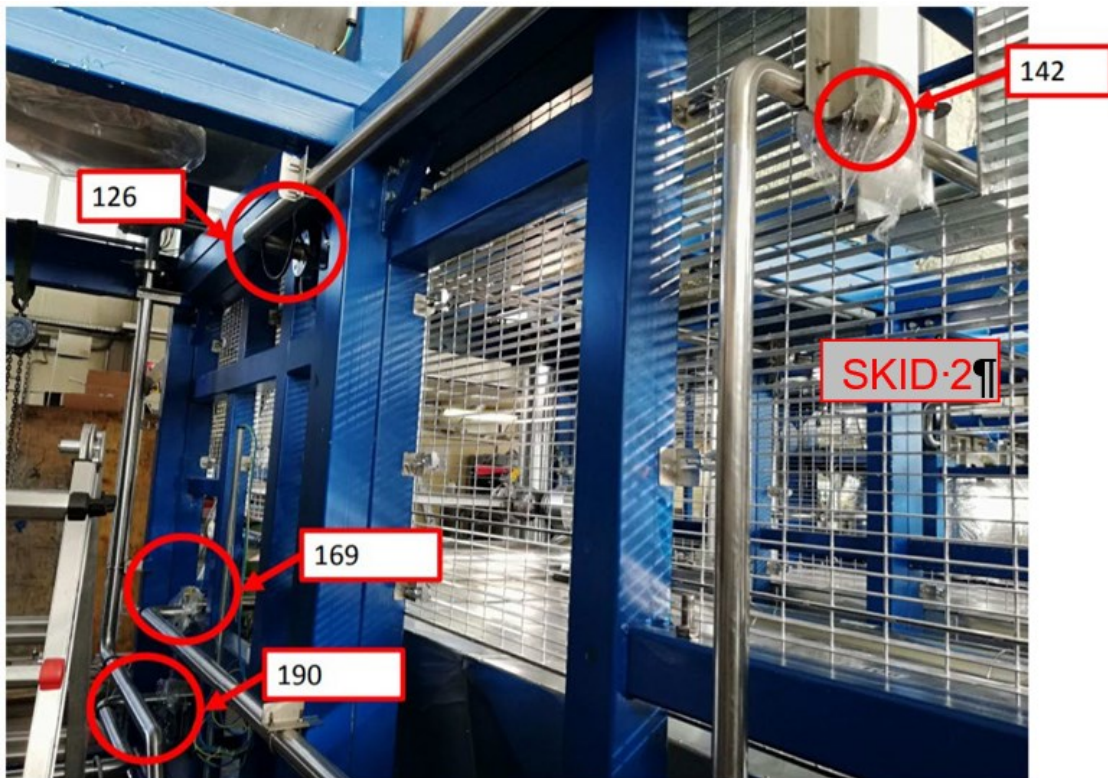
Blind flanges of skid 2 to be removed before the installation of skid 2 on skid 1. Lines connecting Skid 2 and Skid 3 (126, 142, 169 and 190)
